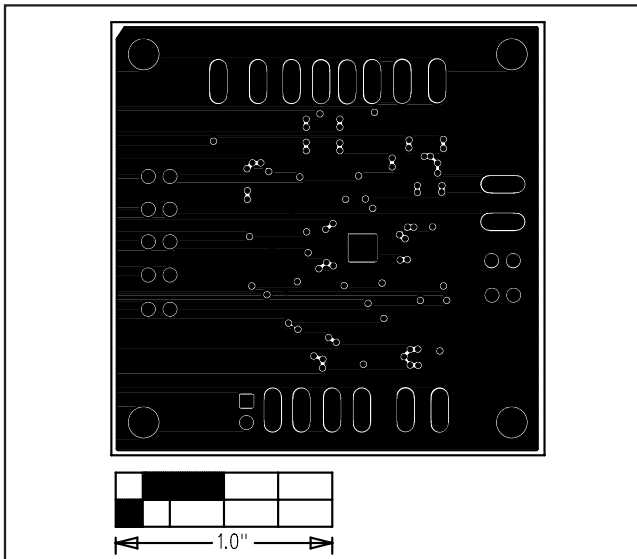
MAX8680 EV Kit PCB Layout—AGND Layer
